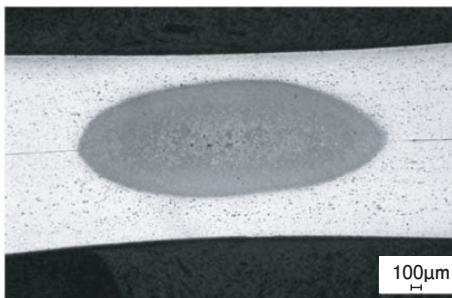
Cross section of resistance spot welding of aluminum.
